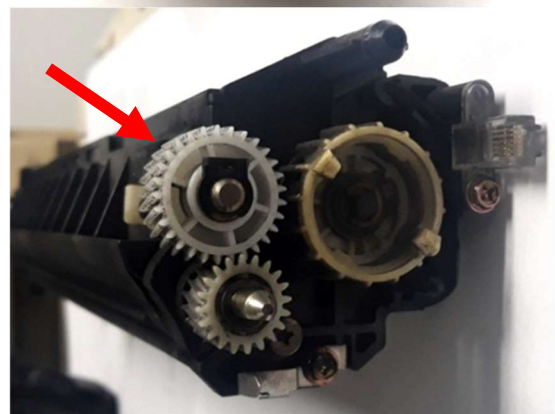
Visualization of the reconstructed gear wheel with the mating gear wheel
